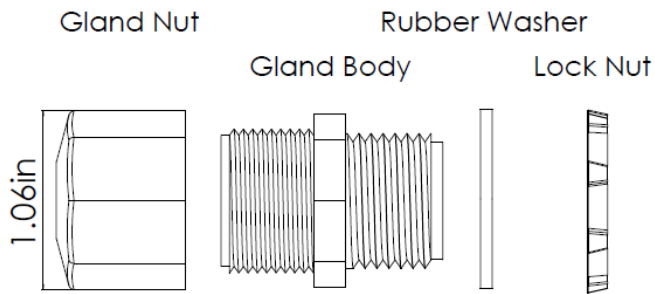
Cable Gland Components Side View, w/o Plastic/Rubber Clamp Bit
